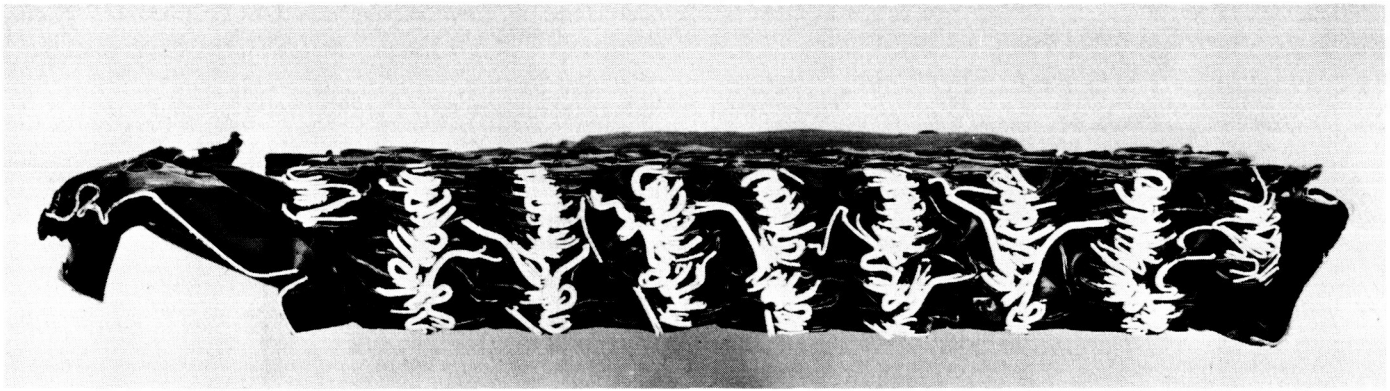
Cross section of maraging steel hexagonal cell honeycomb, fully collapsed; wall thickness, 0.024 in.
